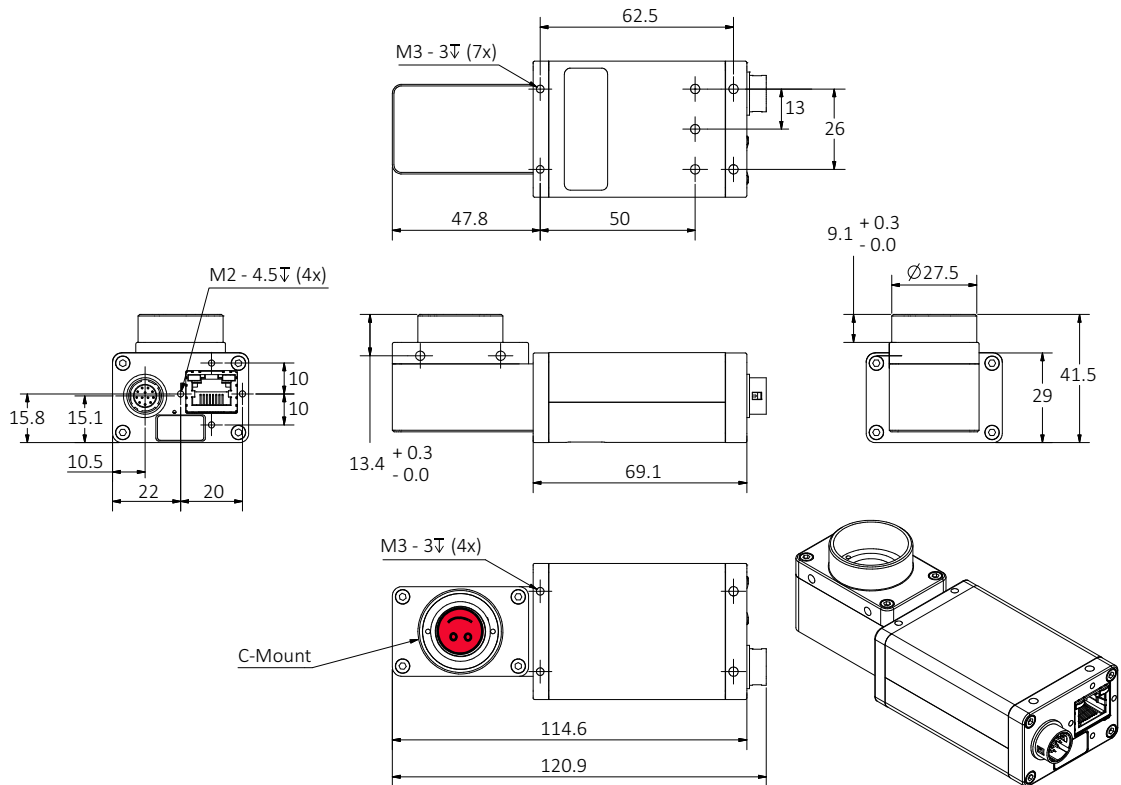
Manta type A W90 S90 housing dimensions (including connectors)
